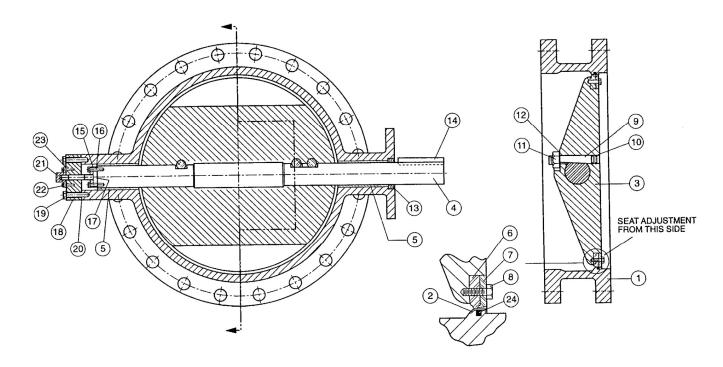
STANDARD BUTTERFLY VALVE CONSTRUCTION#
